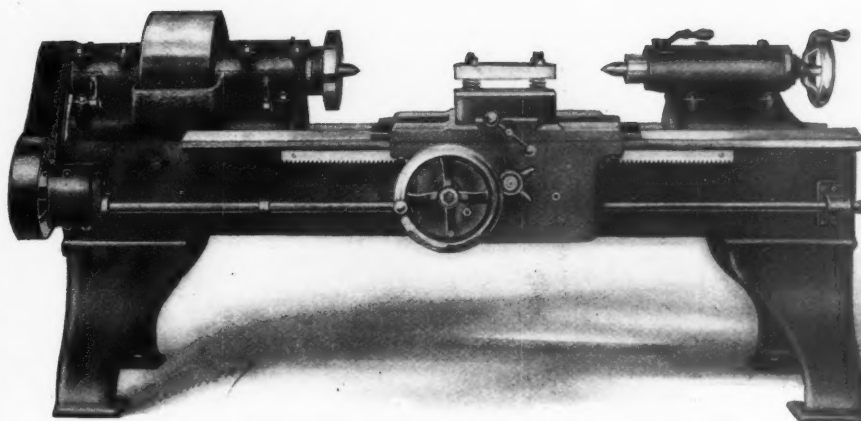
Himoff Lathe equipped with a Single Pulley on the Spindle
